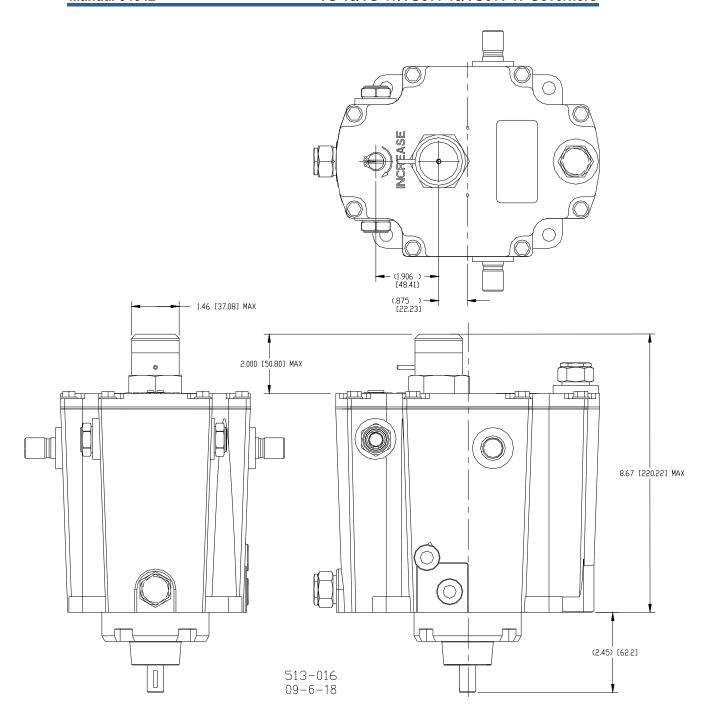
TG611-13/TG611-17 Outline Drawing
